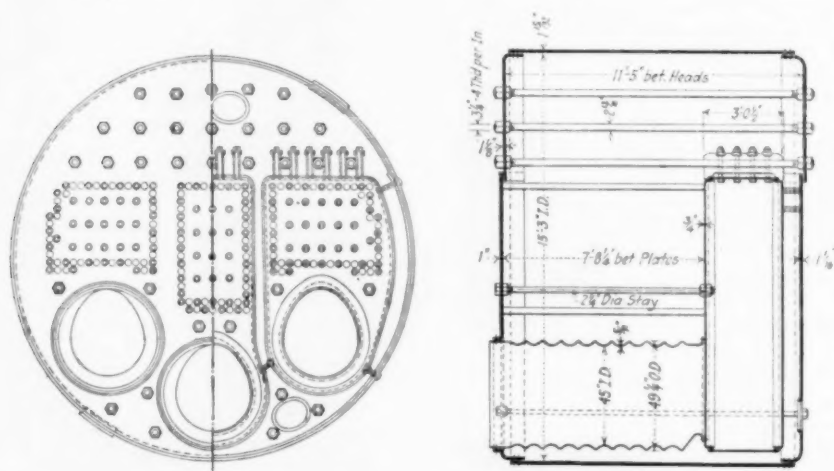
GENERAL ARRANGEMENT OF SCOTCH MARINE BOILER TESTED
